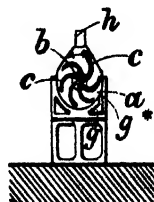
Rotary Tray Tea Drying Machine (transverse section).
